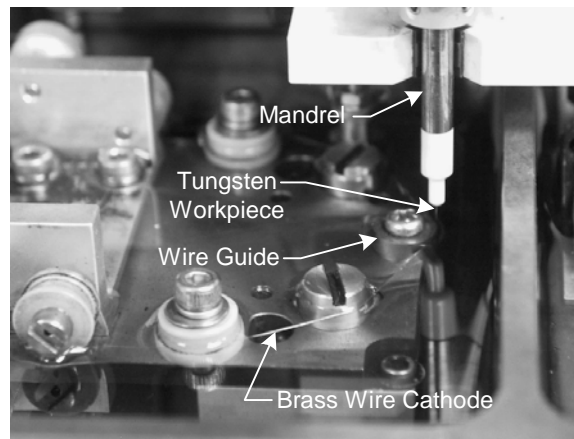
Panasonic MG-ED82W micro EDM machine, WEDG setup
